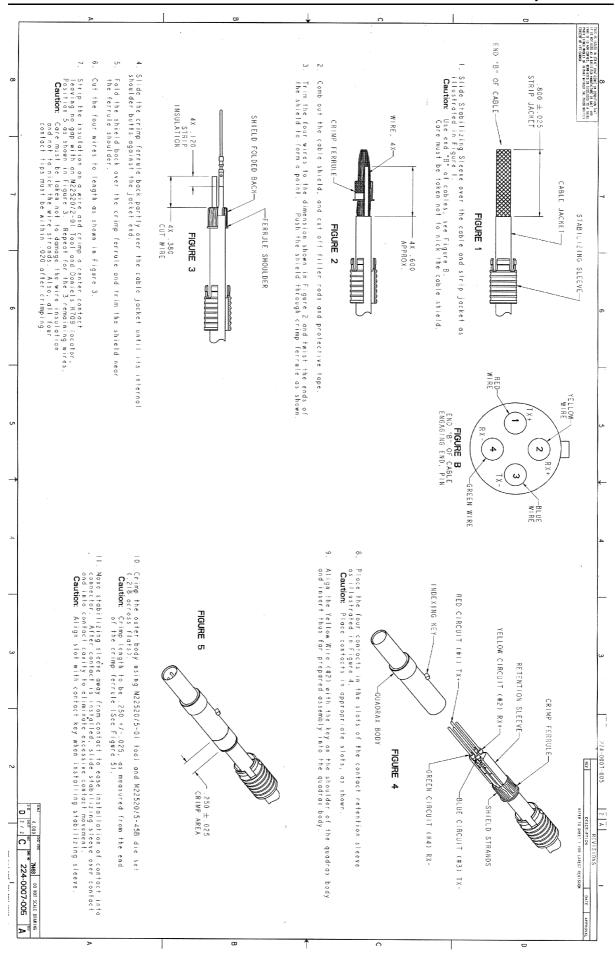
Contact Assembly: Quadrax Pin size 5 special: ITT Cannon 244-0011-001
